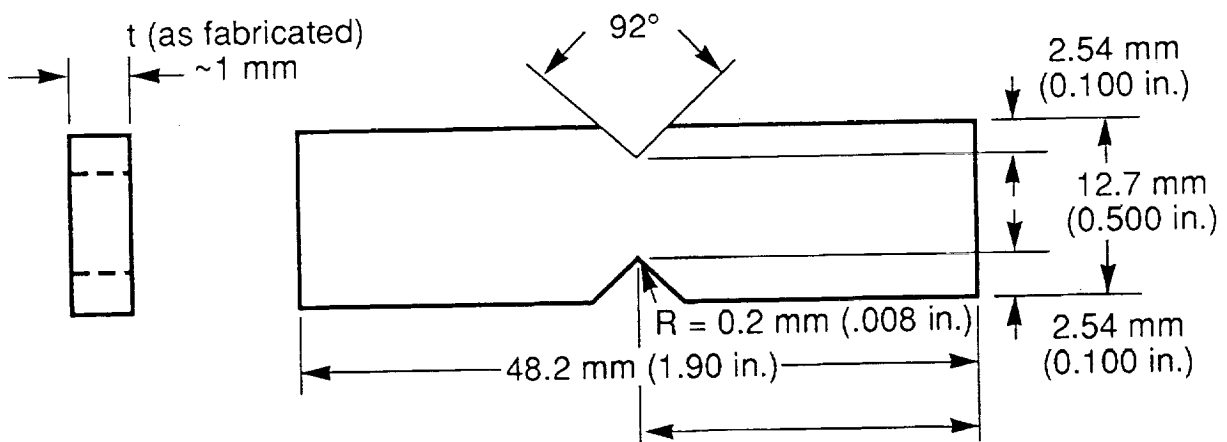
Iosipescu In-Plane Shear Specimen. Dimensions in mm. (in.)
